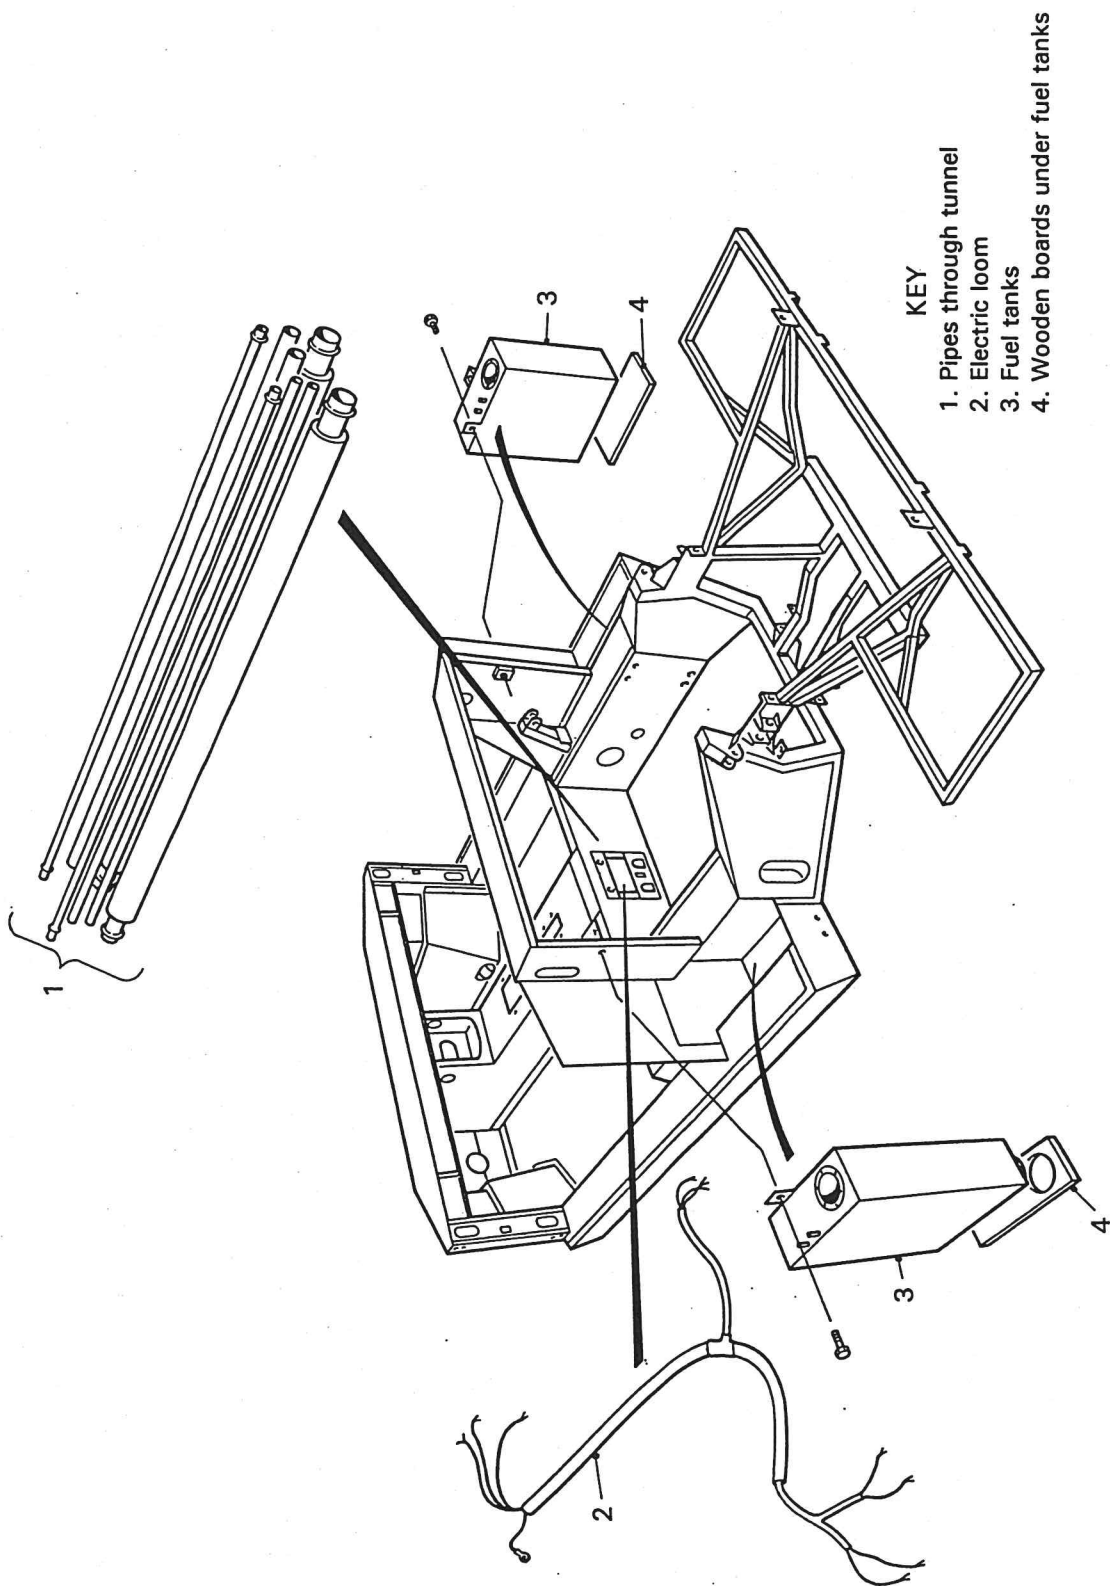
Fitting Pipes, Electric Loom and Fuel Tanks
